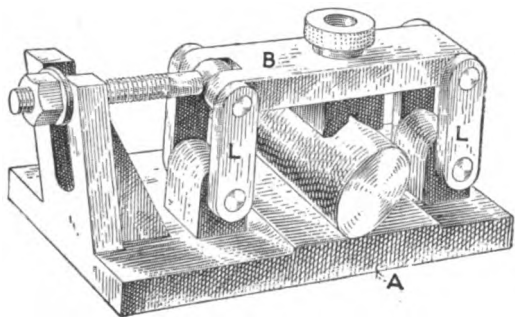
DETAILS OF JIGS USED IN MACHINING PRINTING-PRESS CYLINDER ELEMENTS
